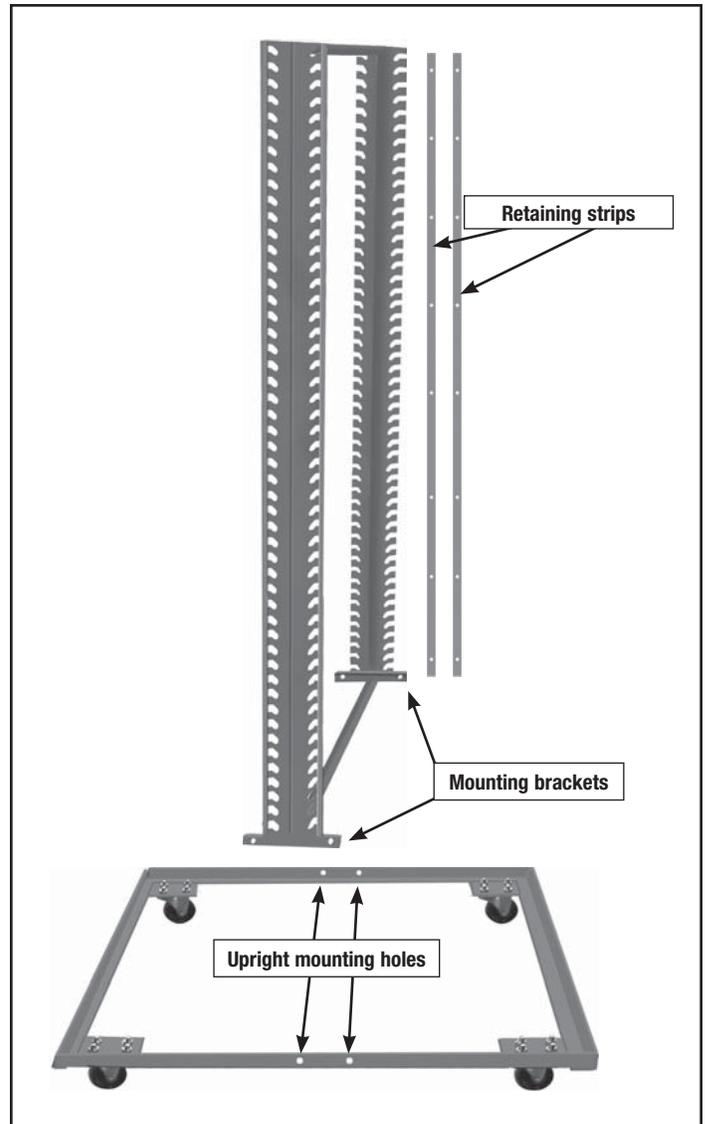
Attach upright to base; side of upright with welded lock strips is in foreground (Model MR1824D)
